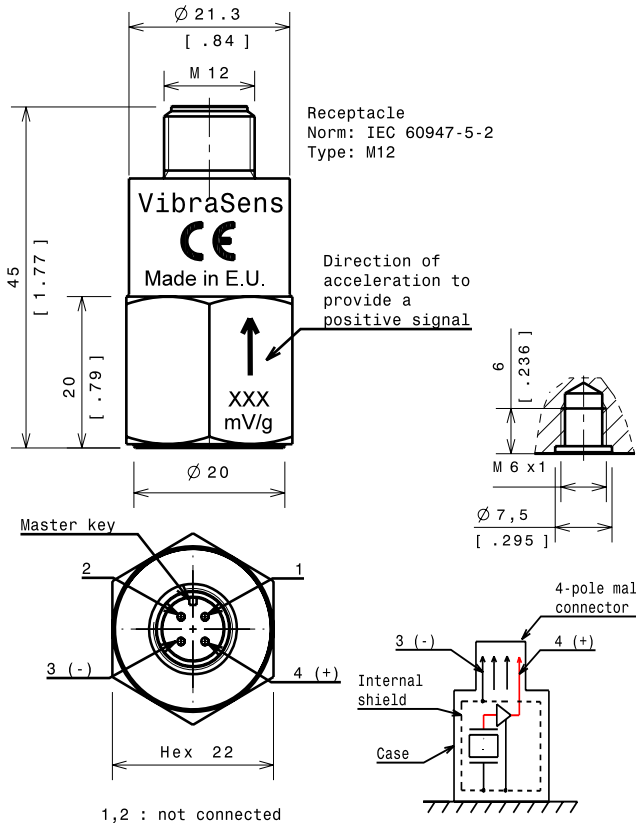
Outline drawing & Electrical layout, B=2, 3
